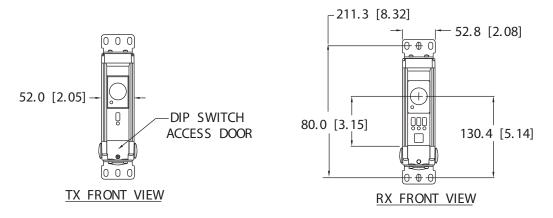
Receiver and Transmitter Front View and Mounting Brackets
